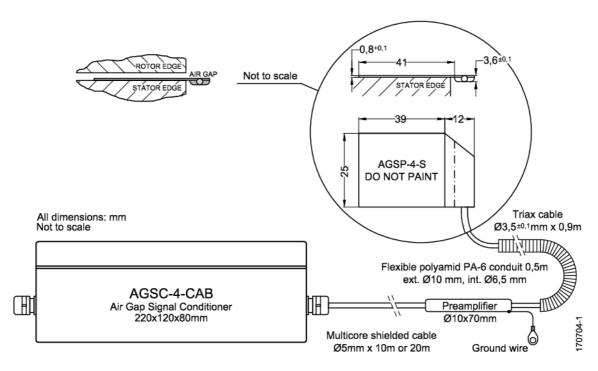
AGS-4S (cable attachment inverted type) outline drawing
